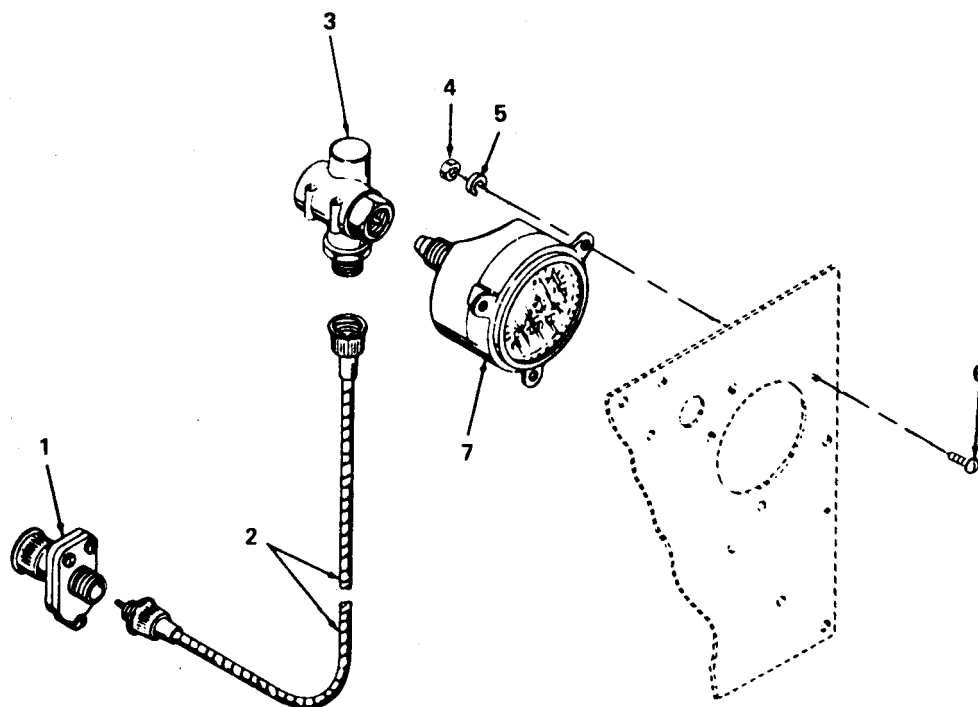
Tachometer-Hourmeter and Drive Assembly.
